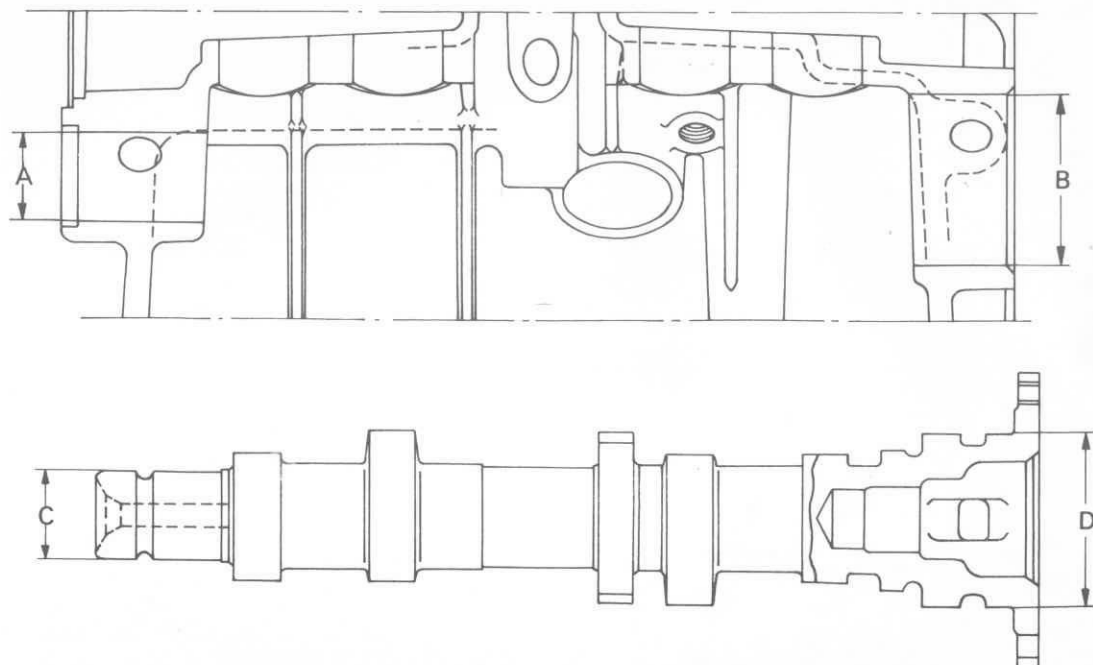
15 Tolerances on standard camshaft bores in crankcase (above) and on camshaft journals (below)
